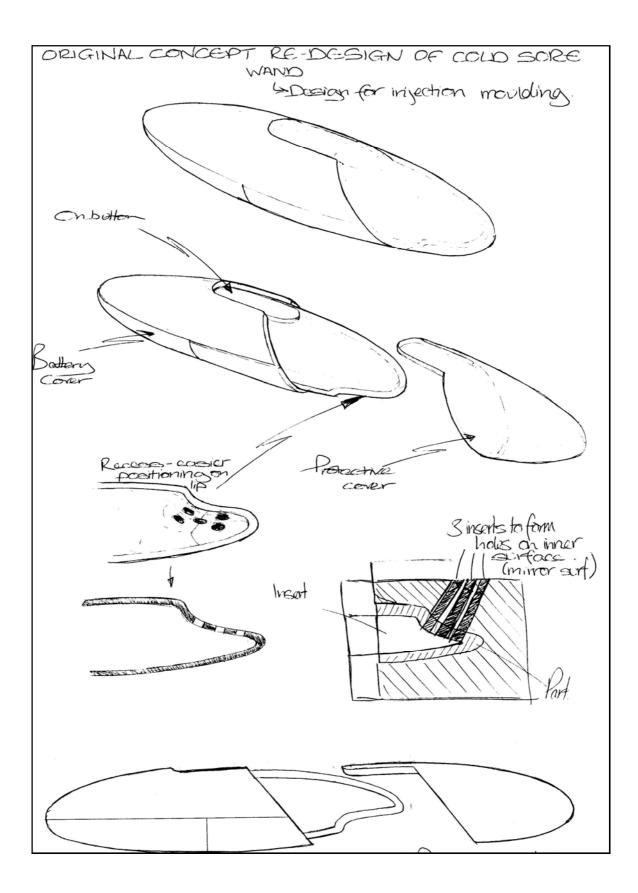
Cold Core Treatment Sketch for Injection Moulding
